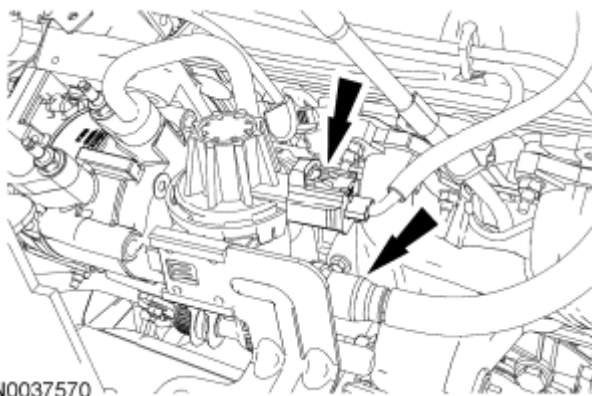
Locating EVAP Canister Purge Valve Electrical Connector
